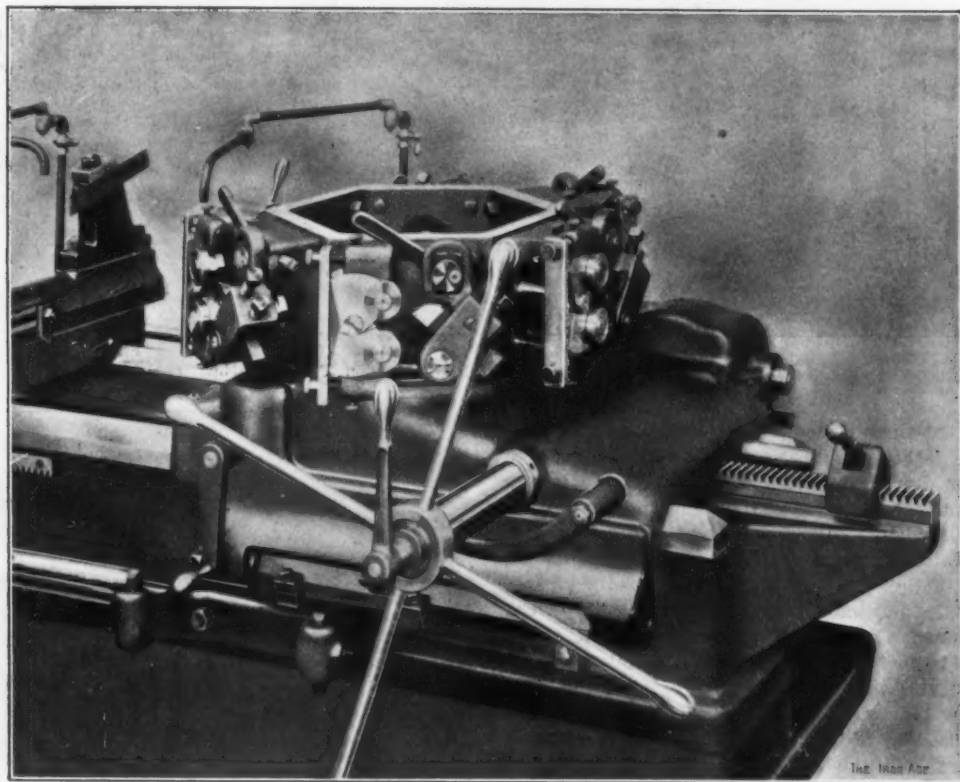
View of the Turret, Showing Tool Equipment, Turret Saddle and Independent Stops.
